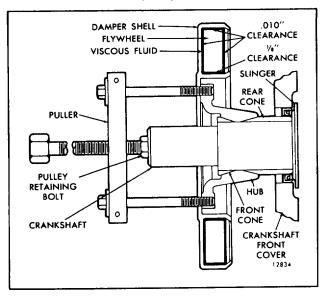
Vibration Damper and Crankshaft Pulley Assembly Mounting
